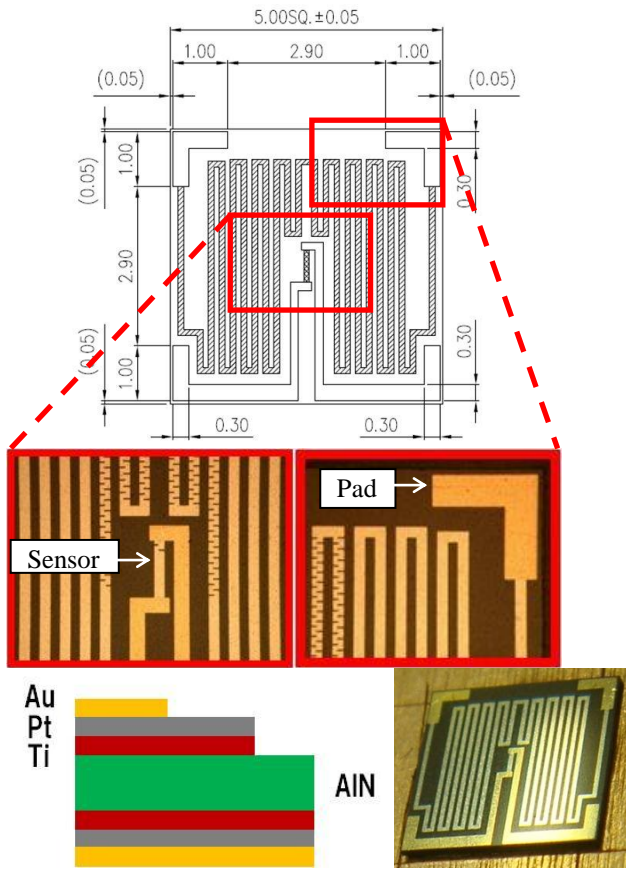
Detail of the heat source: plan view and cross-section of the layered structure.
